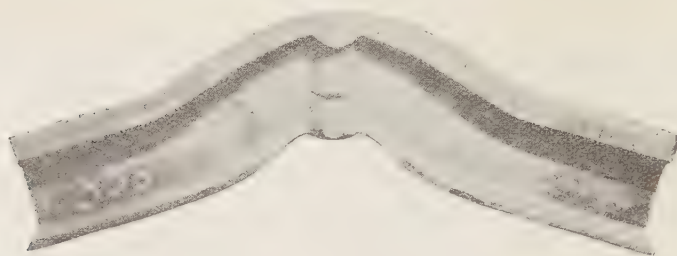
V. — Thermit-fusion weld on new French standard 46-kgr. (92.7 lb.) rails, the head of which was hardened after rolling. The weld was heat-treated to restore the hardness in the rail head, destroyed by welding.
